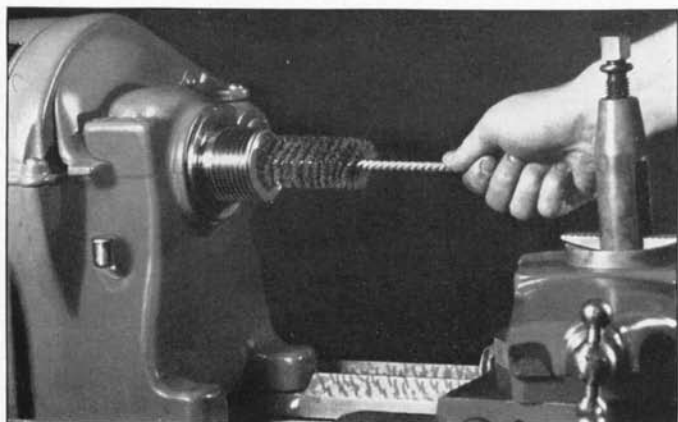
A bottle brush is handy for cleaning chips and dirt out of tapered holes.
